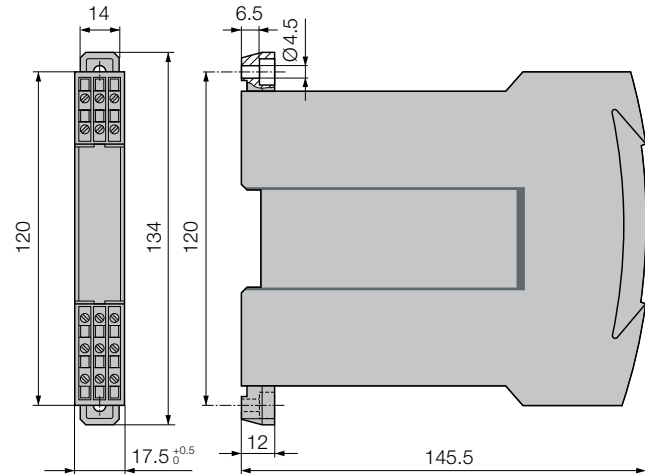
SINEAX TV 808 in housing S17 screw hole mounting brackets pulled out.
